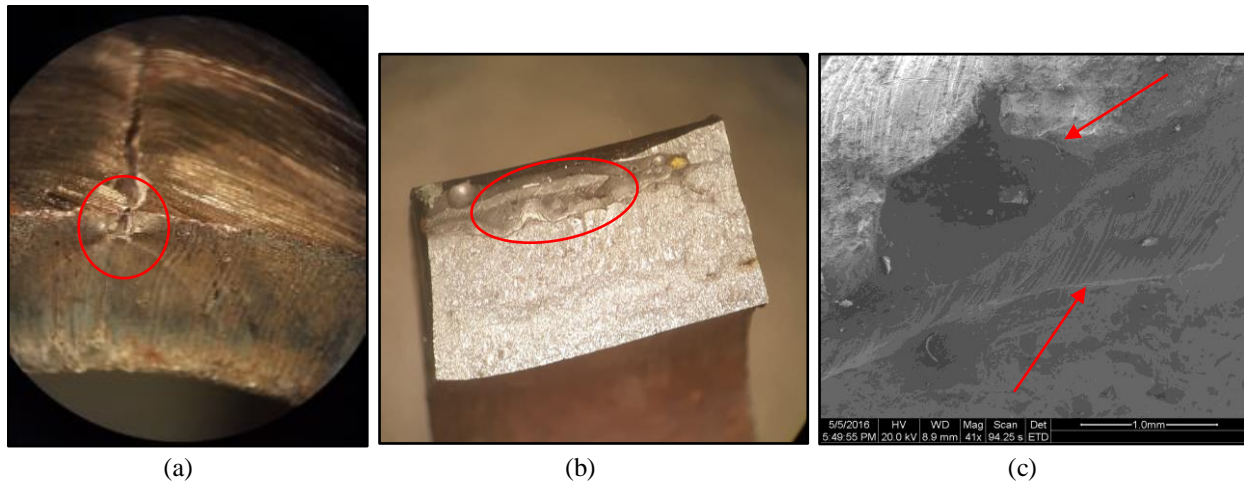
a) Transverse view of the GTAW 1G weld revealed lack of penetration, b) Fractograph revealed gas pockets, lack of filler metal, and lack of fusion, and c) SEM image confirms a gas pocket next to grind marks along the weld metal from preparation, indicating a lack of fusion between the filler and base metal.
